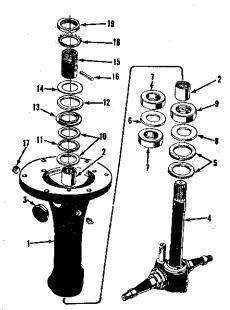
Exploded view of series 333 and 444 power steering dual wheel tricycle spindle and associated parts. The late nylon and steel thrust washer assembly (6 and 7) should be substituted for the early ball bearing type (8 and 9).
